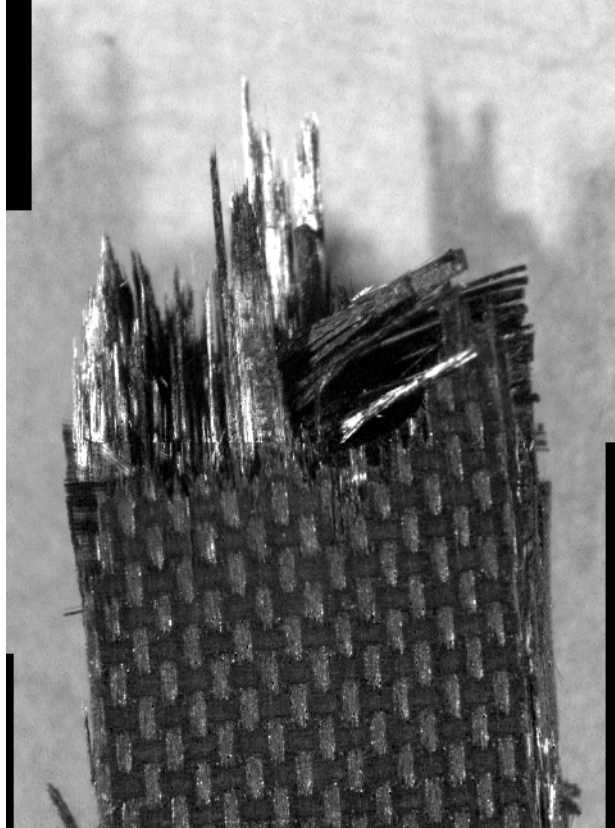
Fracture surface of a [0/90] IM7/BMI 5250-4 specimen subjected to tensile loading demonstrating fiber fracture and fiber pull out after failure
